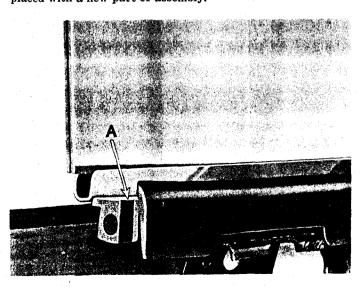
Illustration No. 118 Ventilator Glass Channel Pulled Away From Glass.
